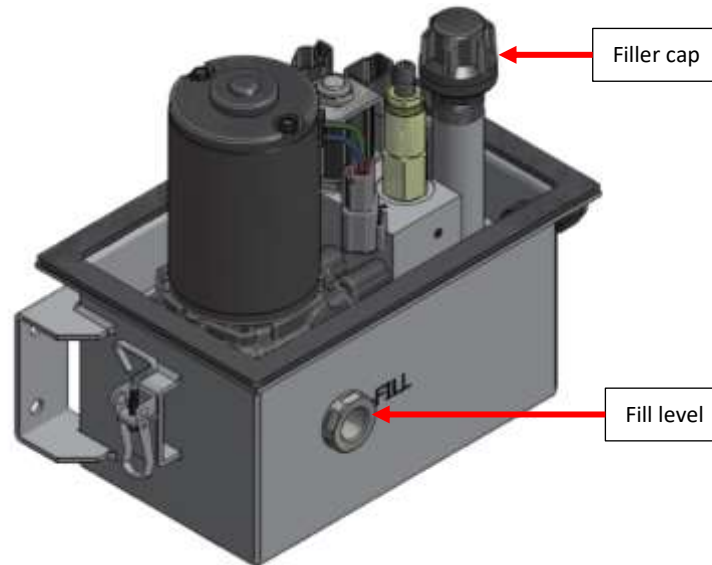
ABT™ Failsafe pump enclosure with lid removed.
